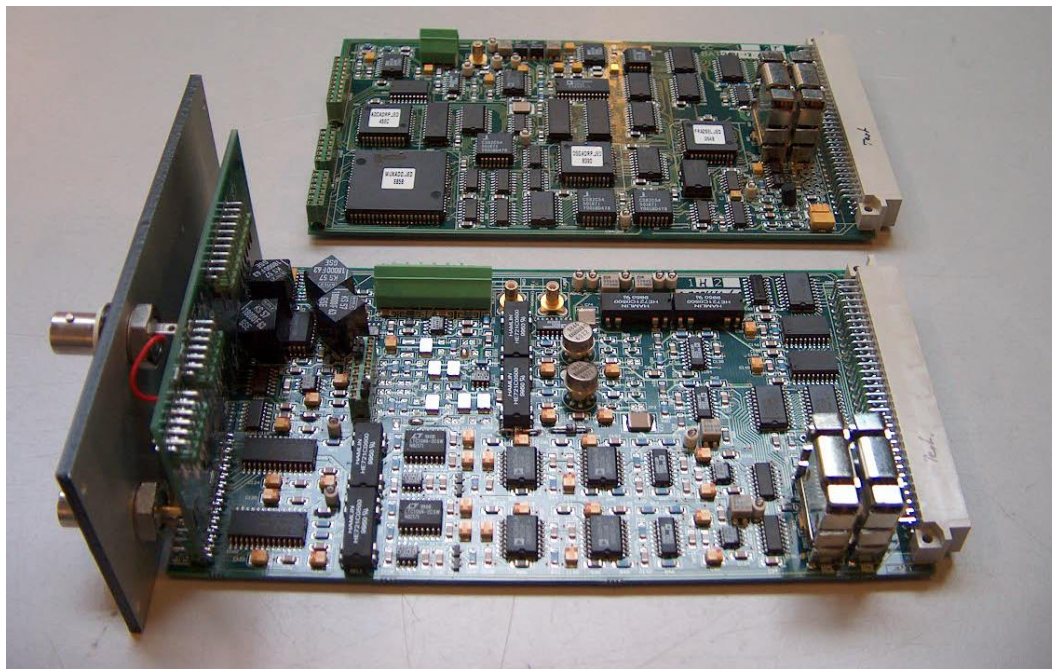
The removed DSG PCB and the Analog PCB of the FRA2 module
